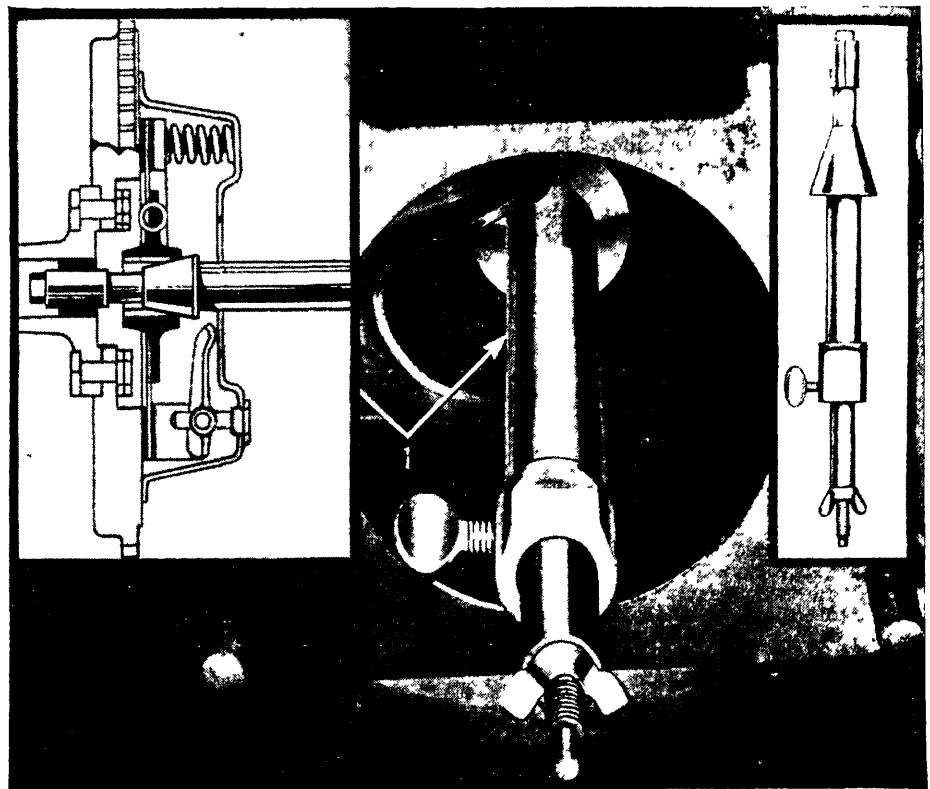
Showing use of clutch plate aligning arbor (1) used when removing and installing clutch. 1947-52
